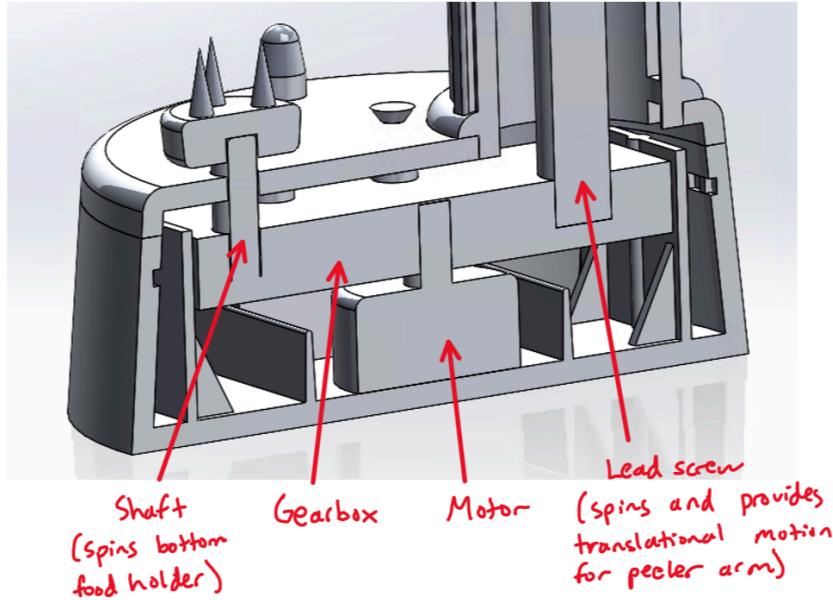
Section View of Motorized Peeler Showing the Internal Components
